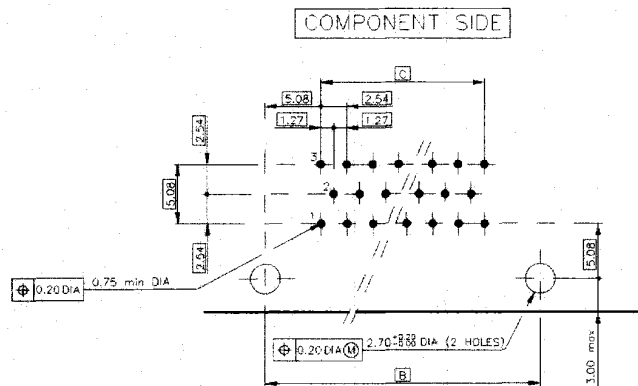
MOUNTING PATTERN, DAUGHTERBOARD APPLICATION, OR IN LINE ARRANGEMENT BOARD-TO-BOARD CONNECTION, (RECOMMENDED PCB HOLE CONFIGURATION).
